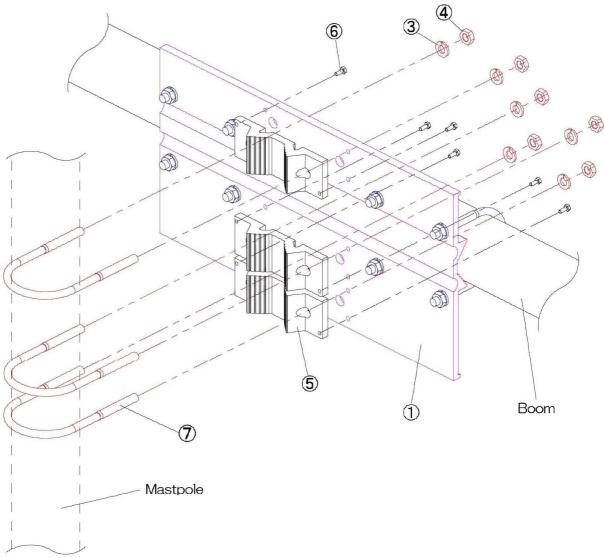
Assembling and Attaching Mast Clamp to the Boom.
